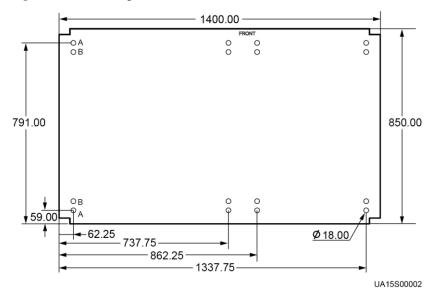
Mounting hole dimensions for the 600 kVA UPS (unit: mm)
